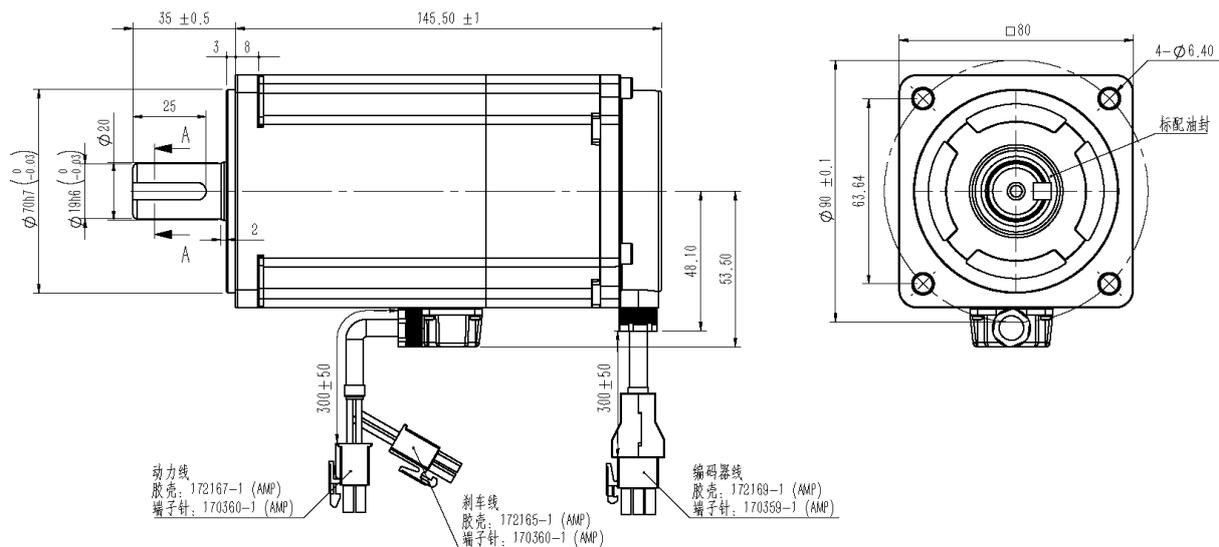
1000W servo motor (with holding brake) external dimension drawing
